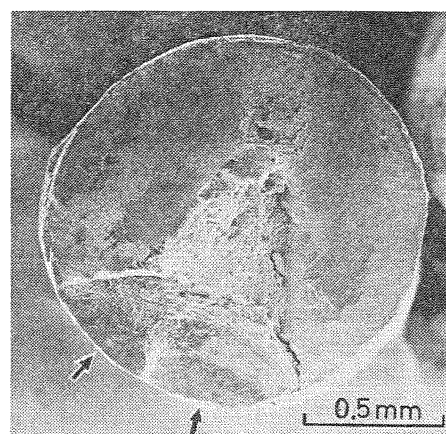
Innerlayer fracture from fatigue crack (This fractured by hand in analysis treatment)
